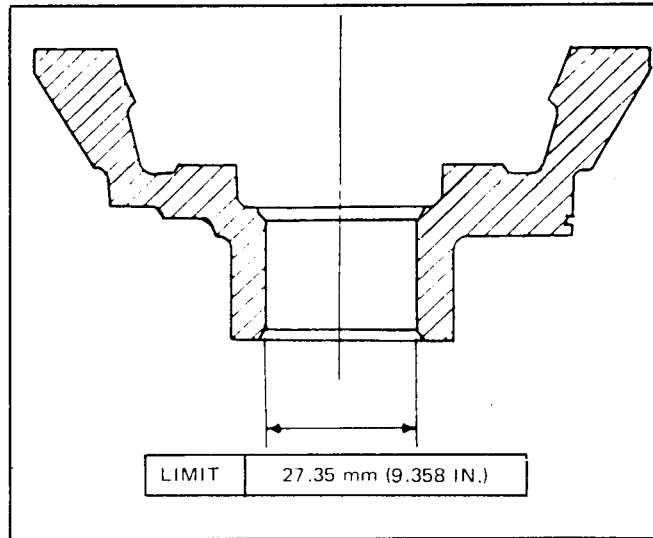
A-81 Differential Case/Drive Axle Shaft Clearance
